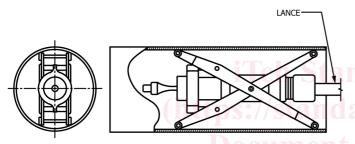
For 125 mm to 305 mm (Approximately 5 in. to 12 in.) Inside Diameter Pipe
